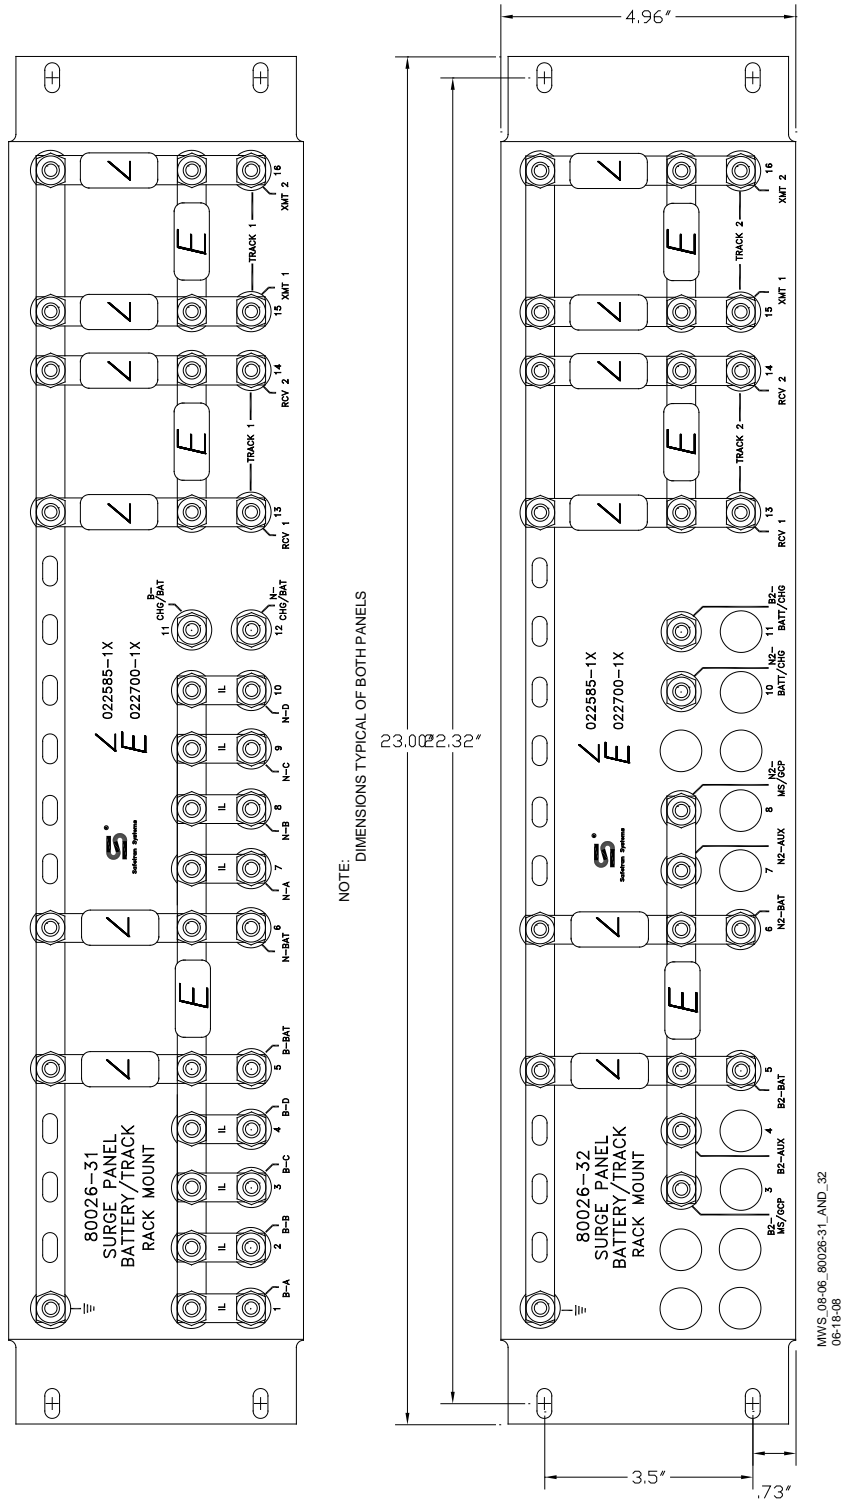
Rack Mounted Surge Panels, 80026-31 and -32
